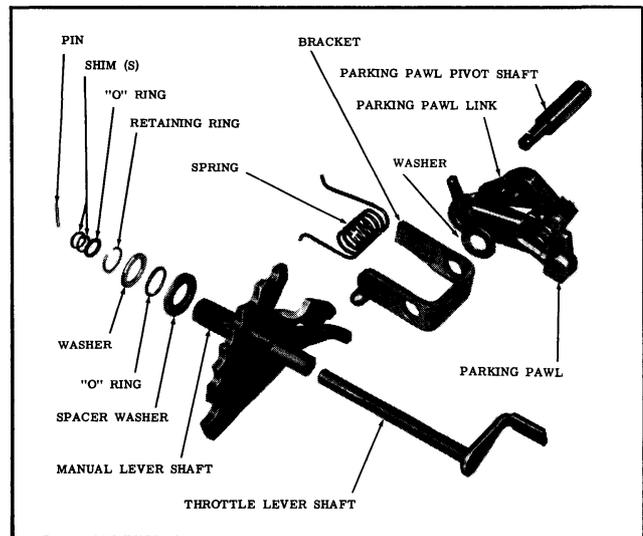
Manual &amp; Throttle Lever Shafts
